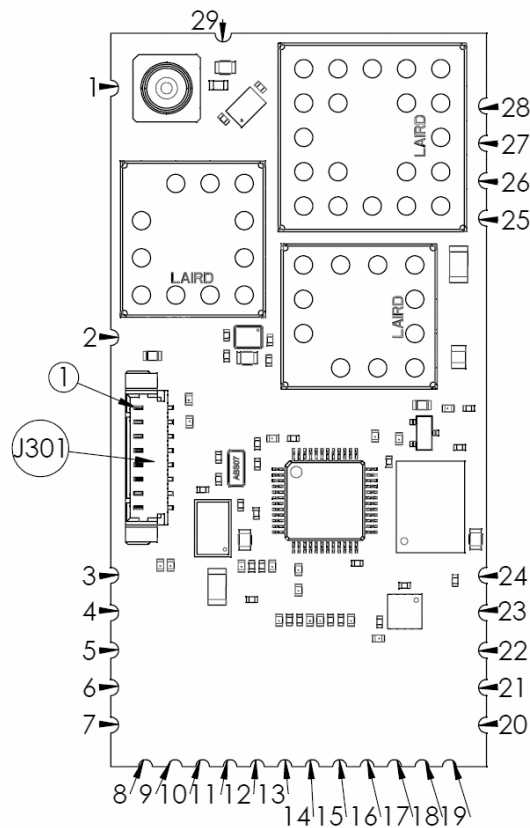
PCB Top View with Service Connector and External Side Connectors Pinout
